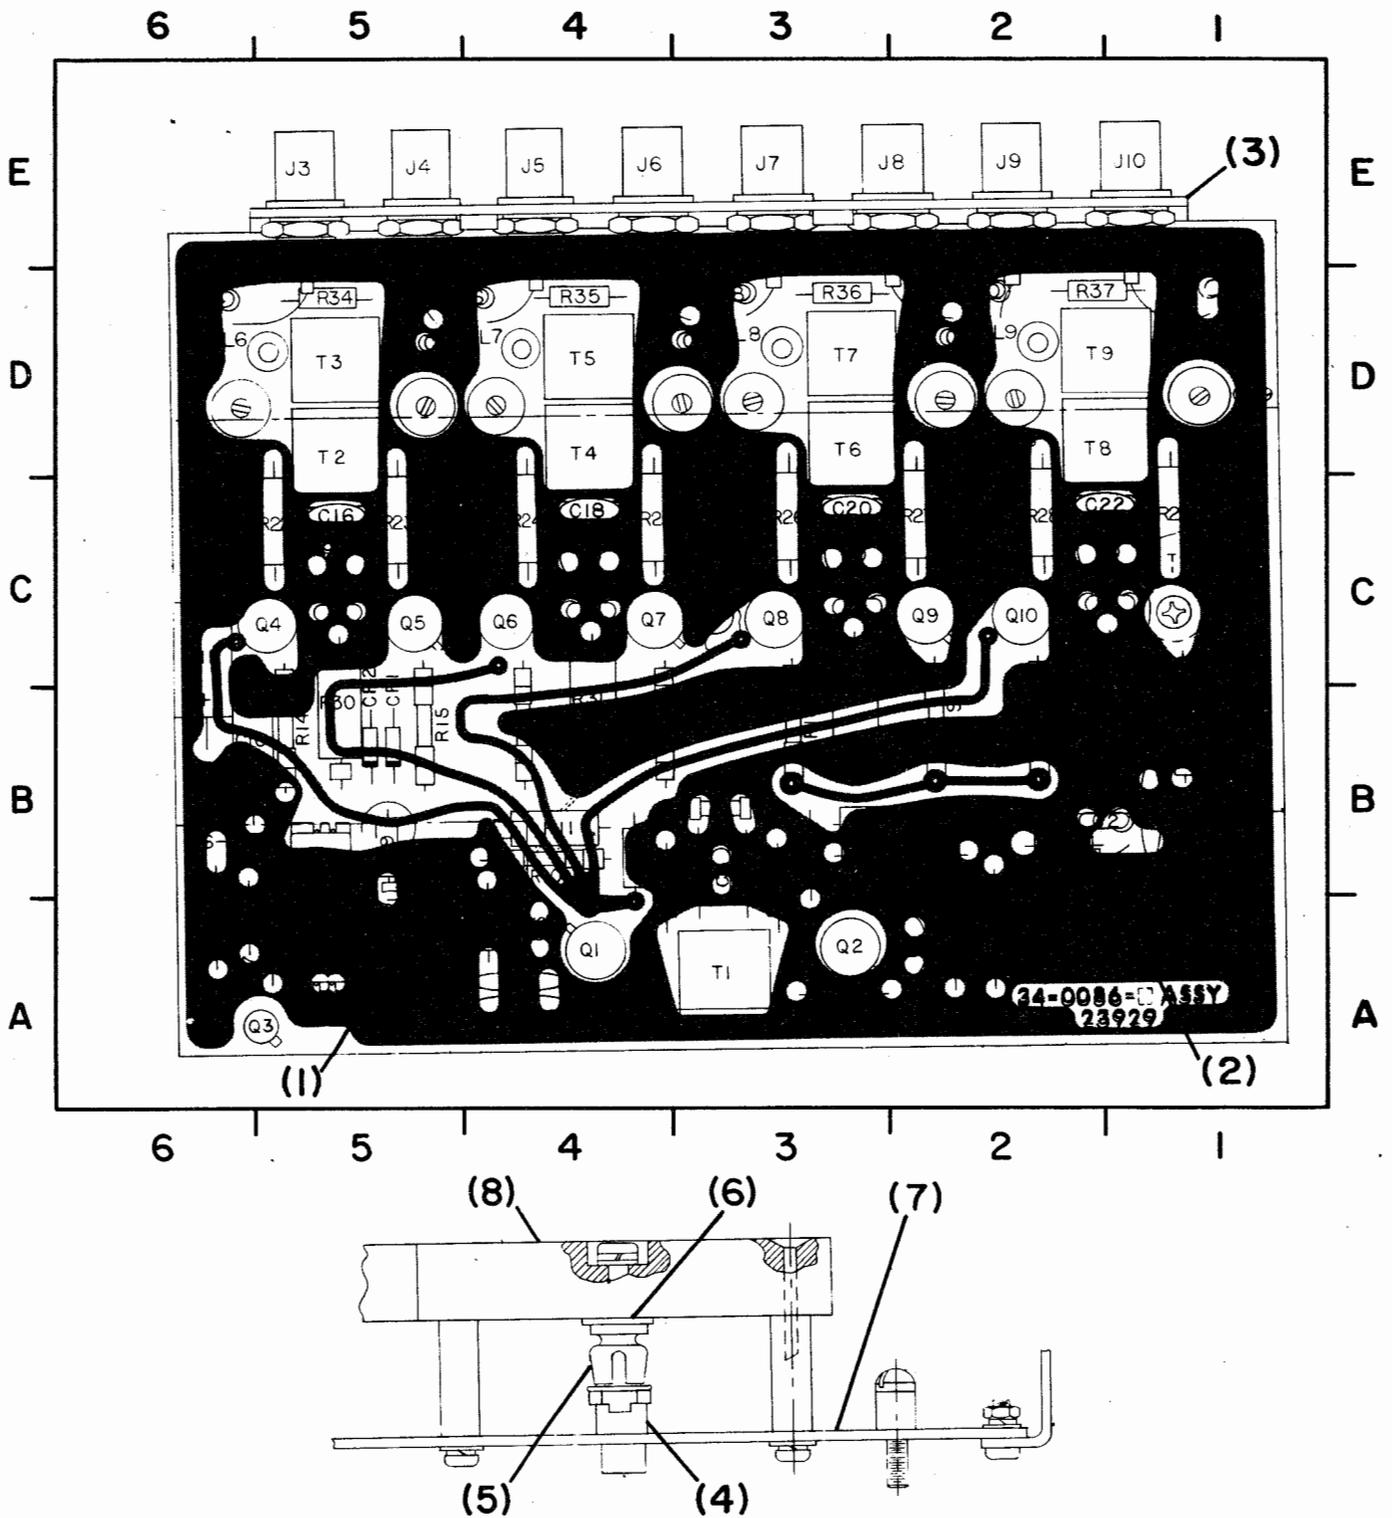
Divider Assembly, 1A2, Parts Location (Top View) (Sheet 1 of 2)
